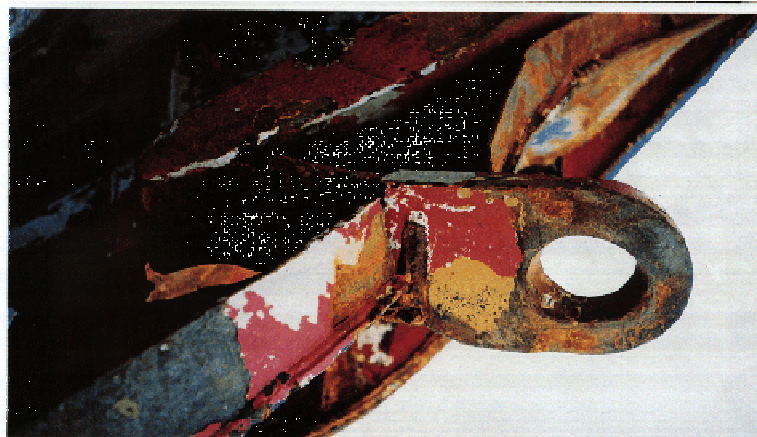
Figure 10.5 in (16) Visor lug of the bottom locking device.
